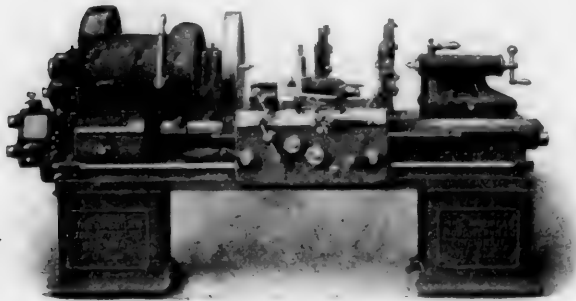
20-IN. LATHE WITH ALL GEAR HEAD.
